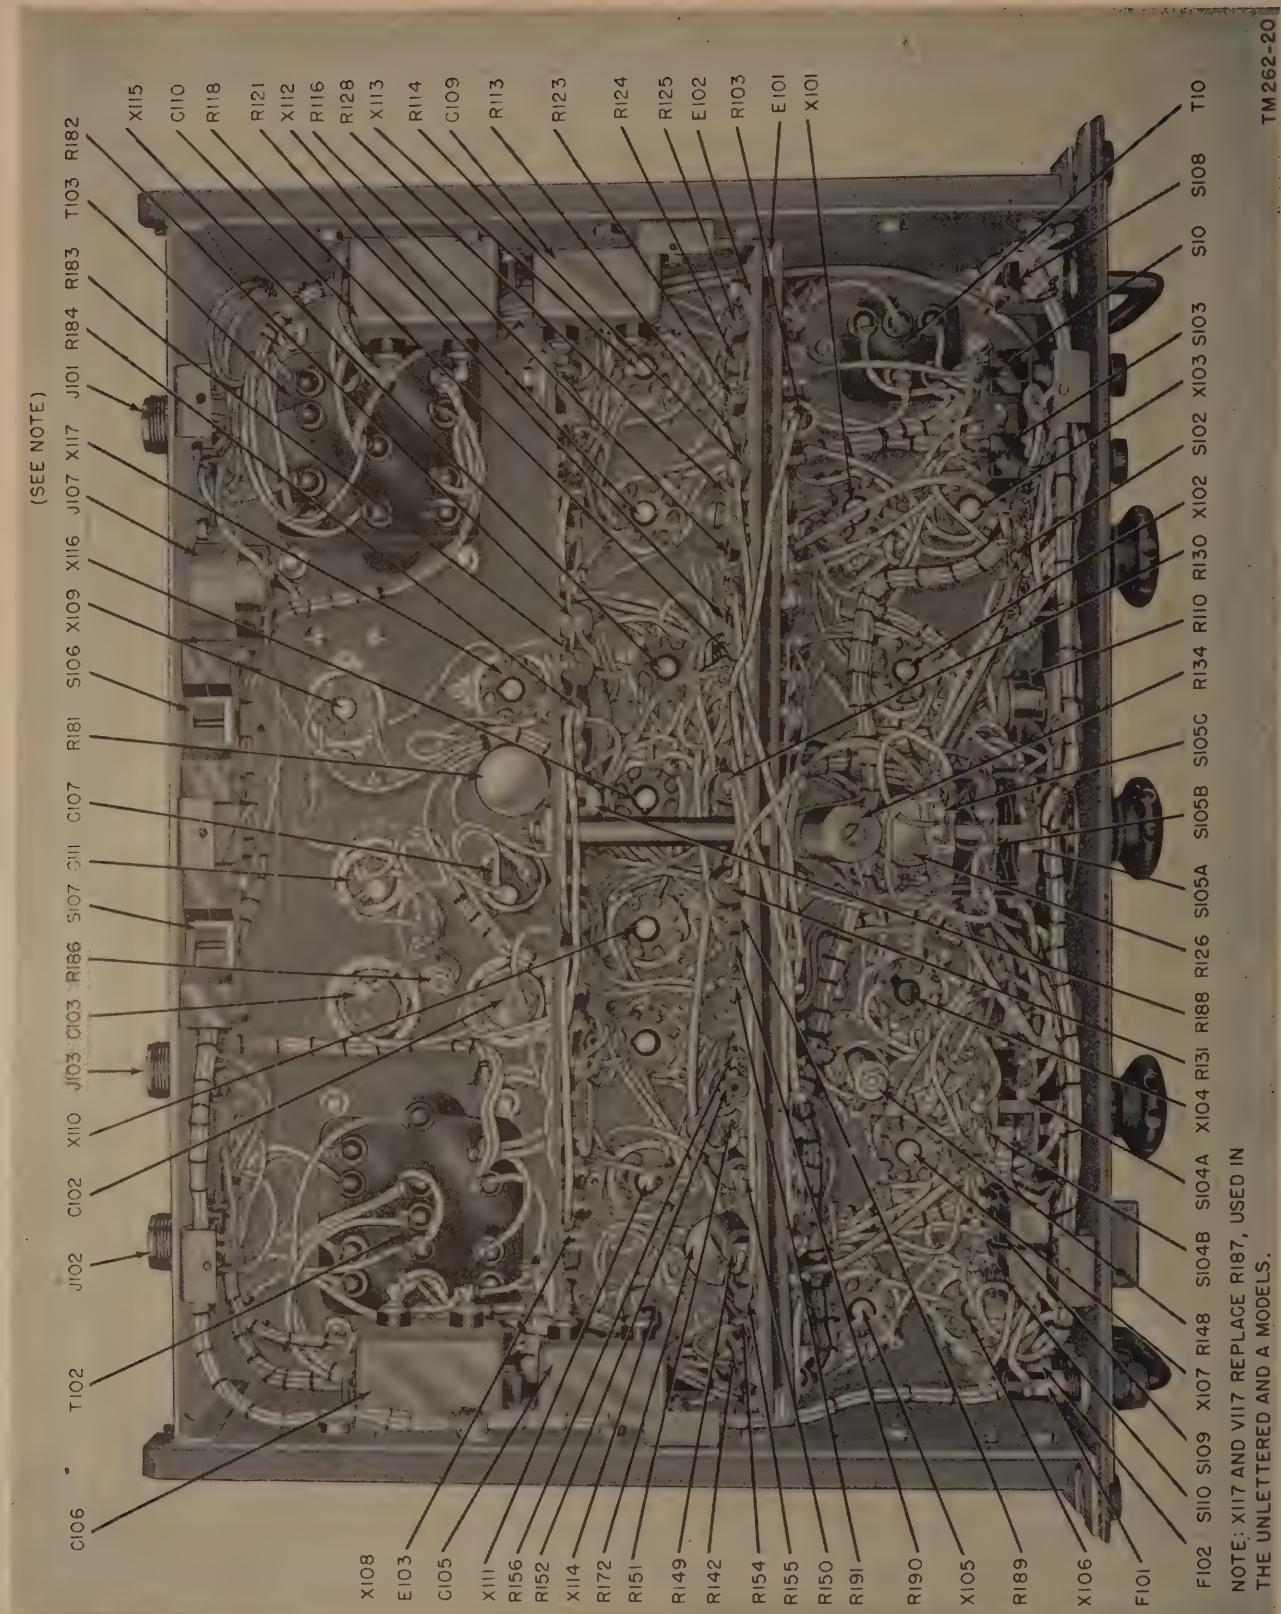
Control Unit C-292B/TRA-7, bottom view of chassis.
